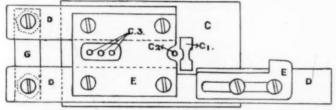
VIEW OF PUNCH HOLDER AND PUNCHES.
